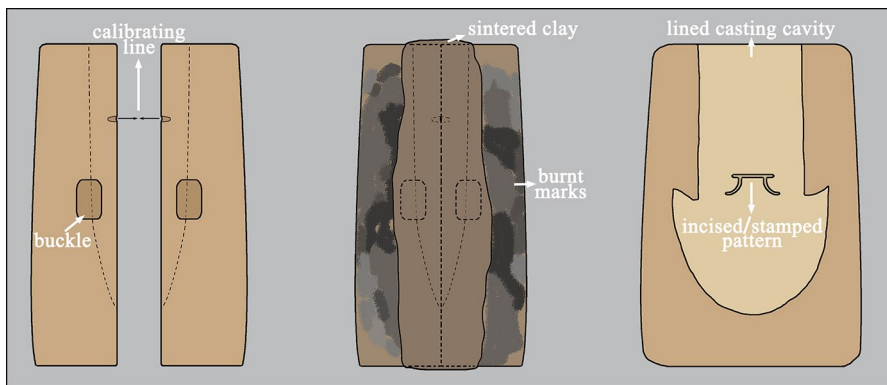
Drawings showing the function of calibrating line, mould buckles and mould lining
